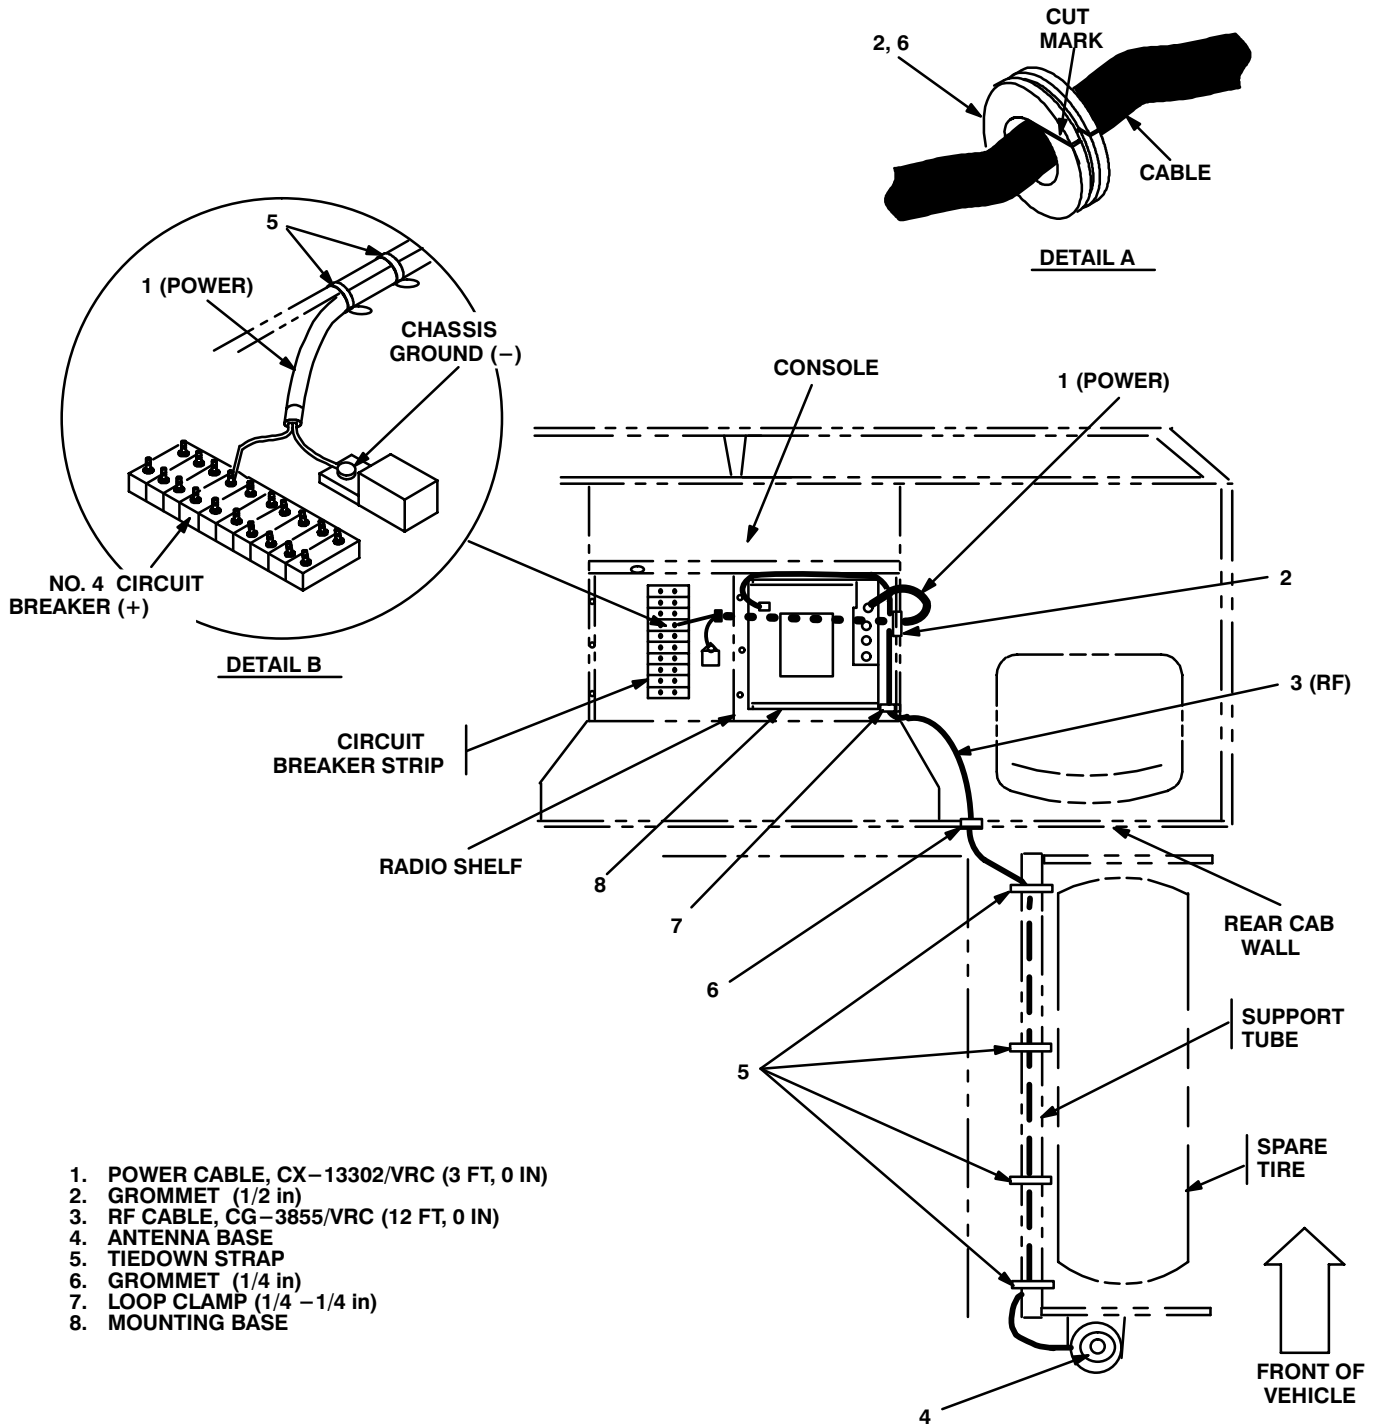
(2). Cable Installation: Power and RF Cabling
